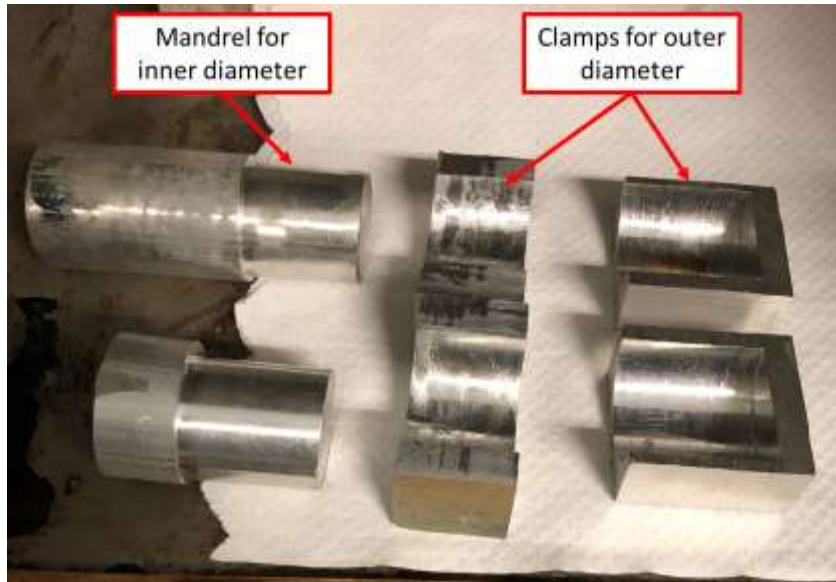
Machined aluminum mandrels specified to the internal diameter of the GT-TAV and machined clamps specified to the external diameter of the GT-TAV.
